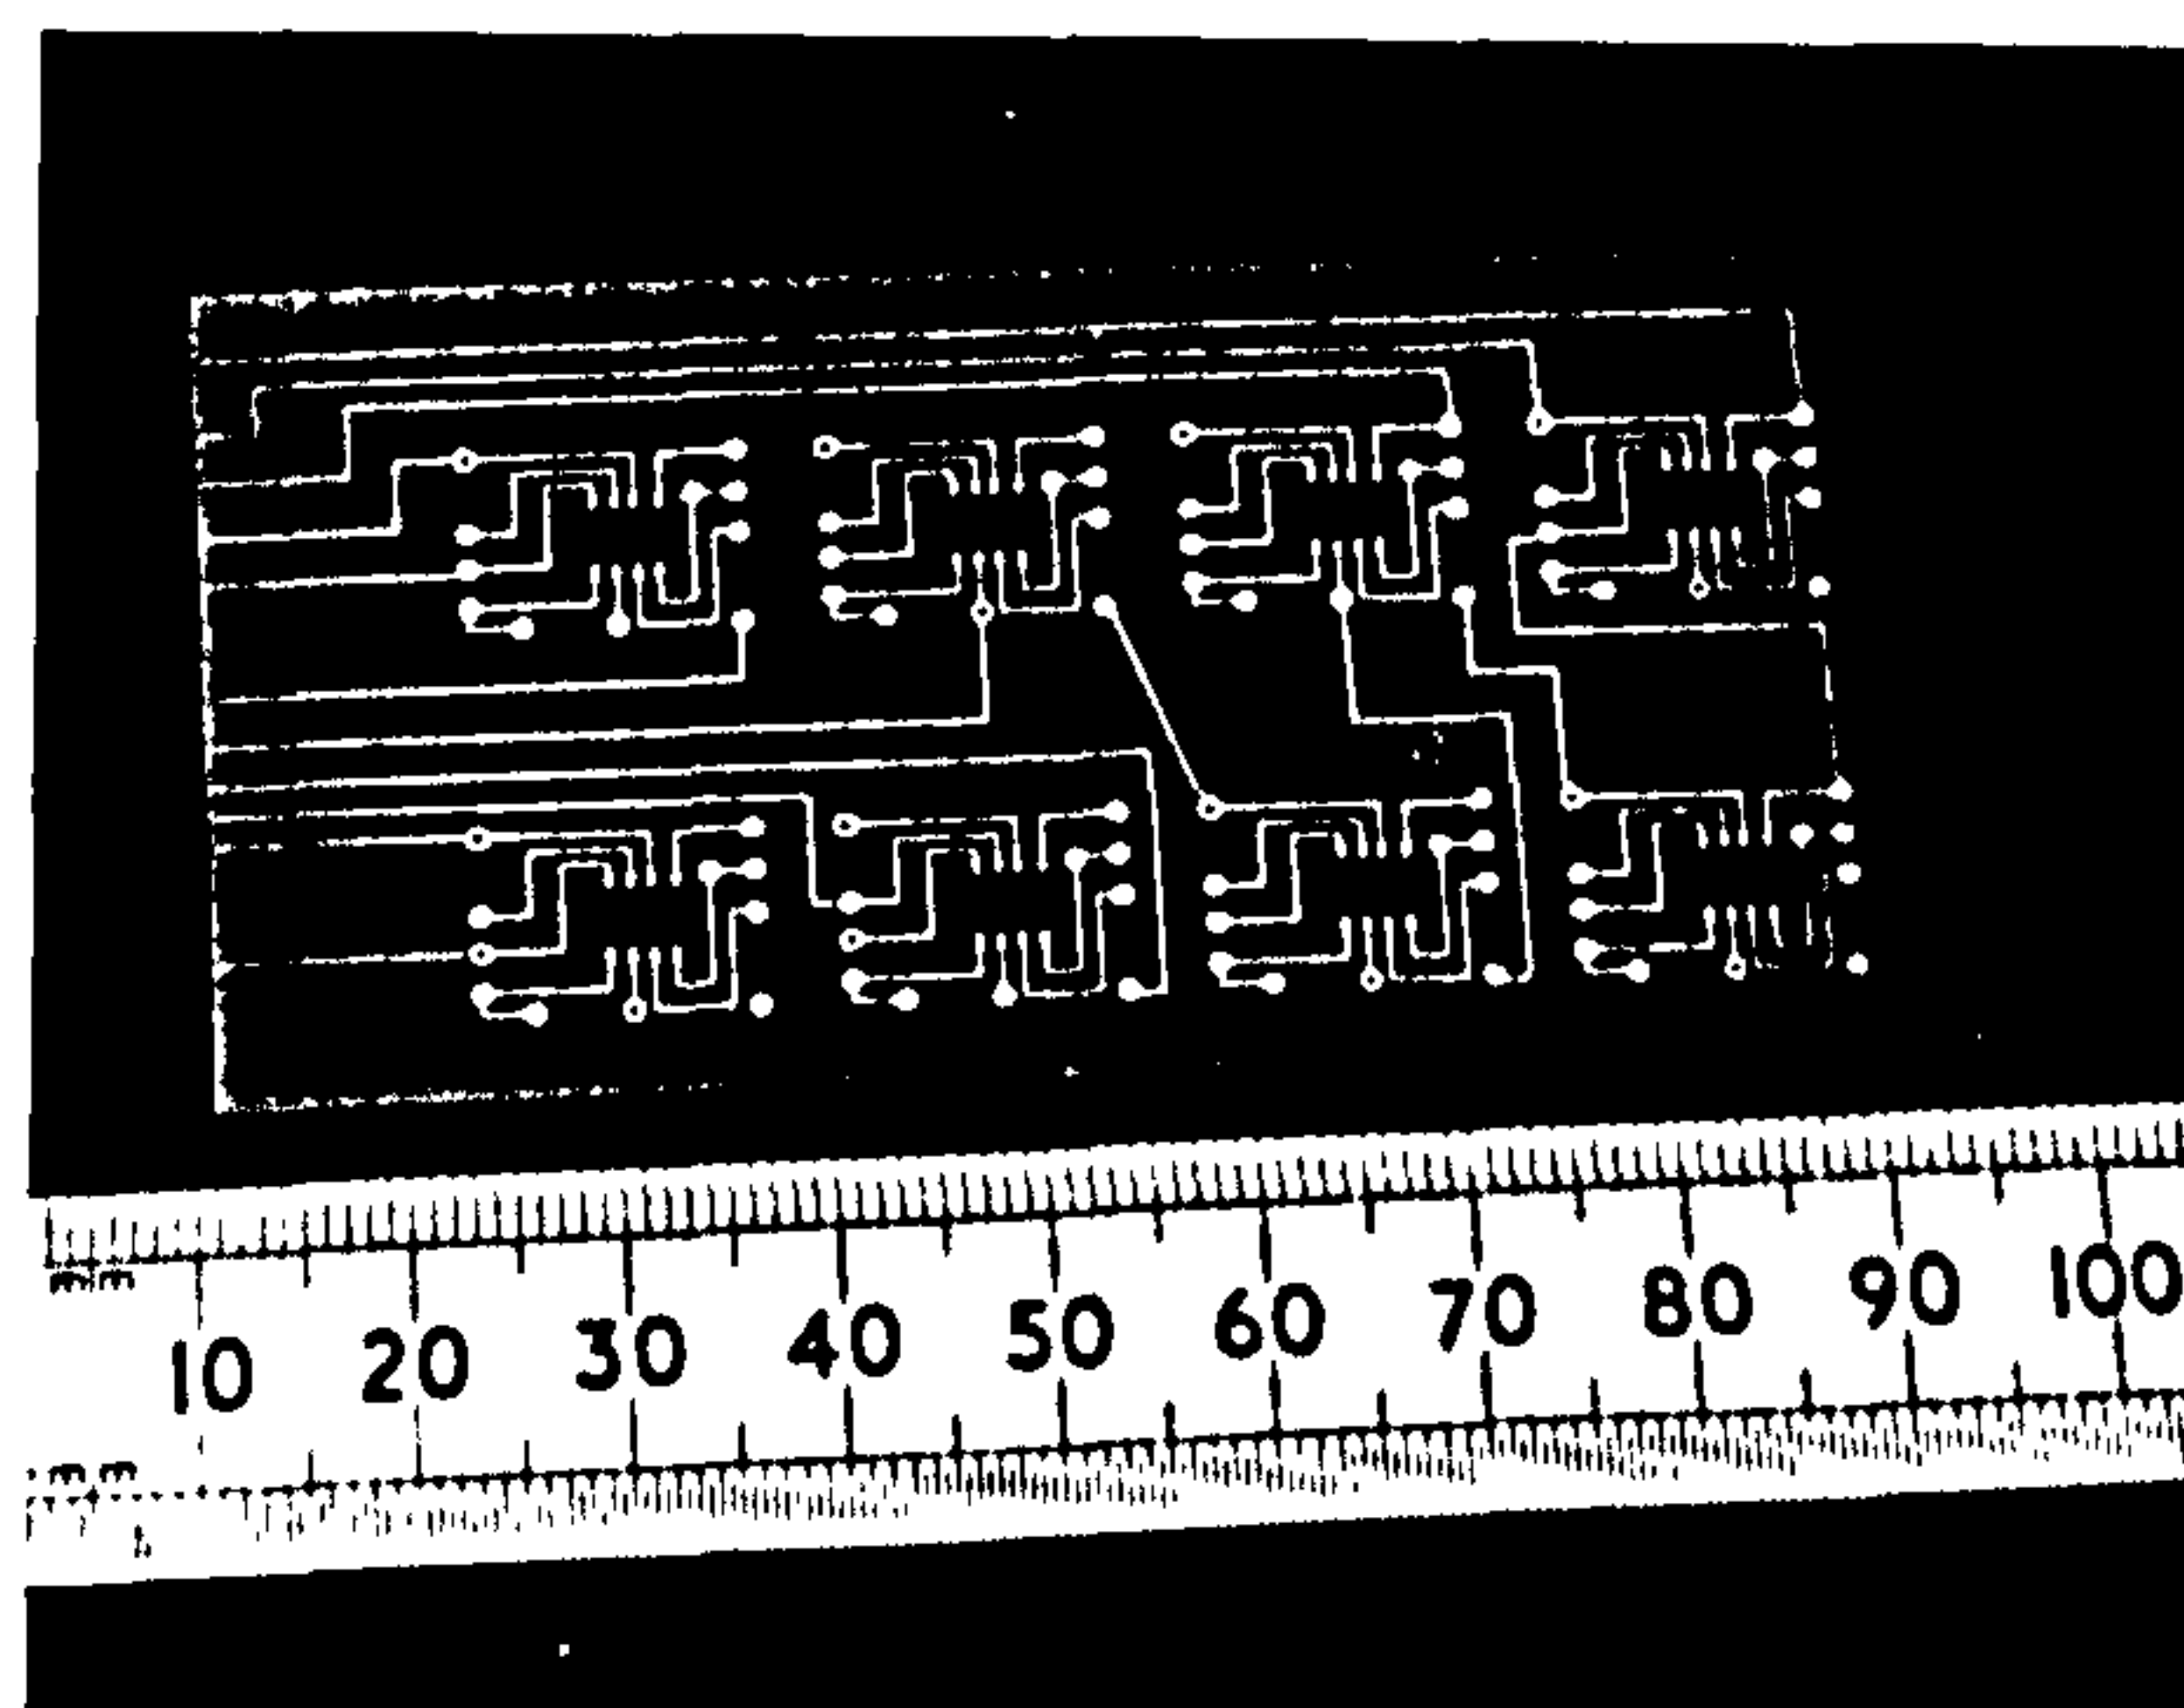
An example of a directly written etch resist pattern for a printed circuit board after etching the copper cladding
